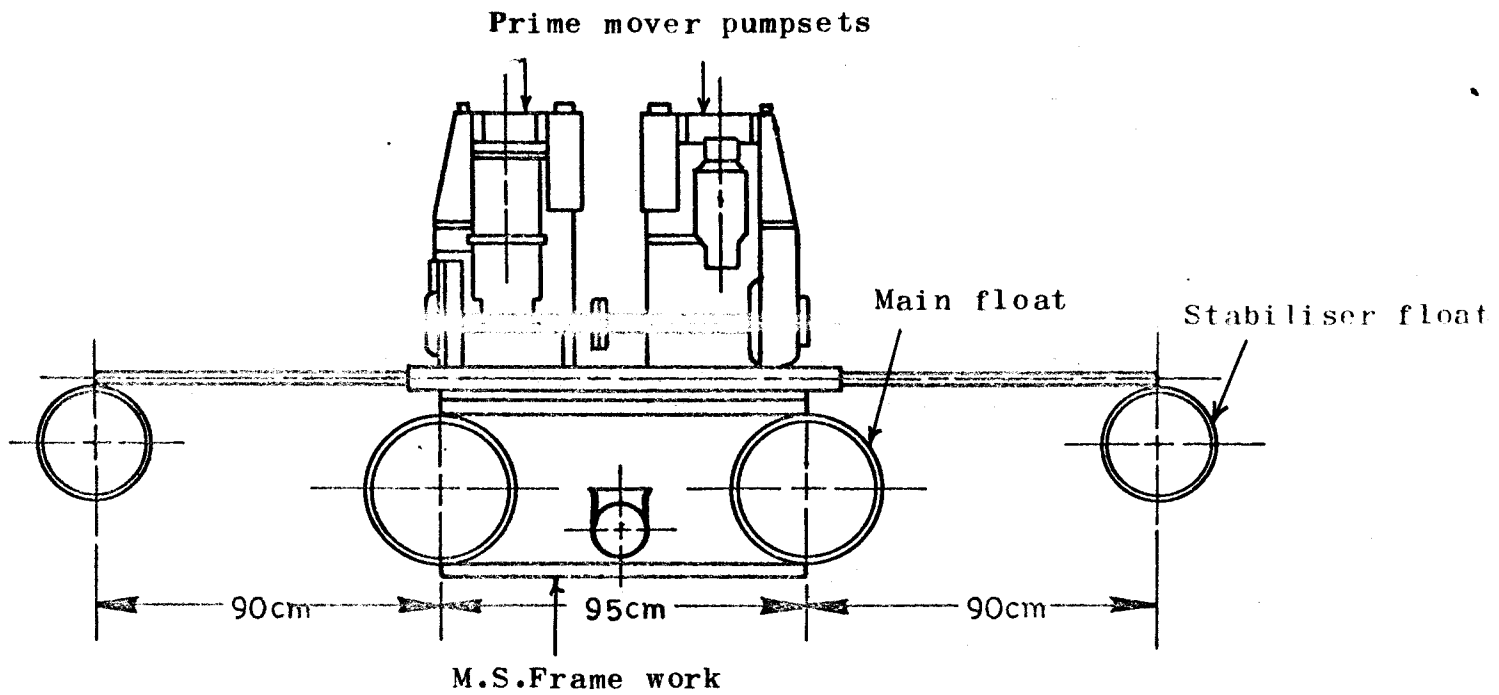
Prototype Palvinia Harvesting Machine - side view
